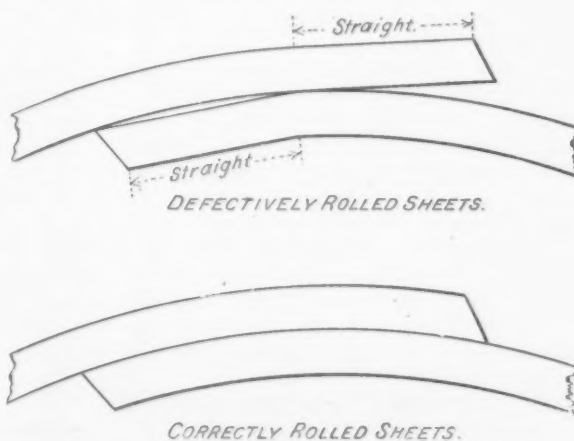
The Wrong and Right Conditions of Sheets Before Riveting.
